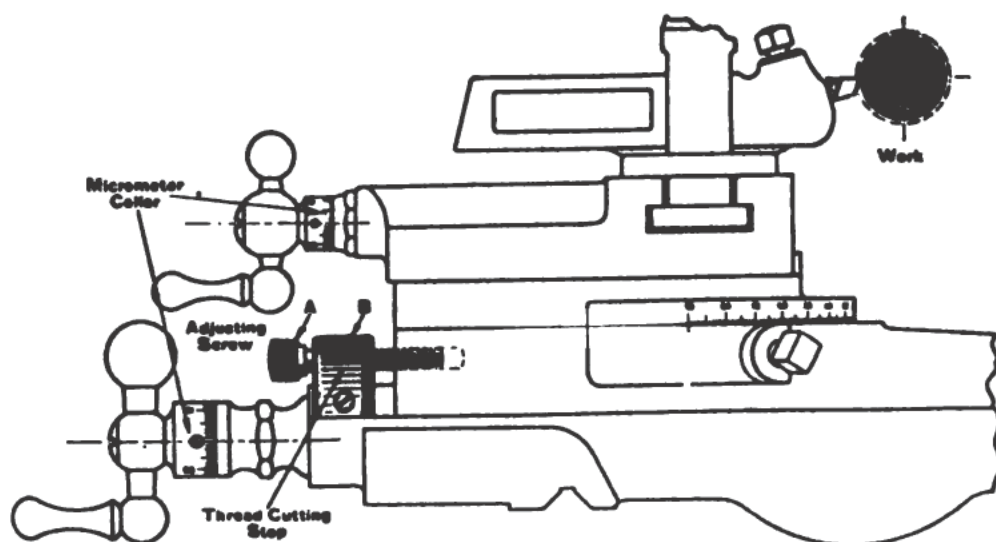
The thread-cutting stop attached to the dovetail of the carriage saddle.
